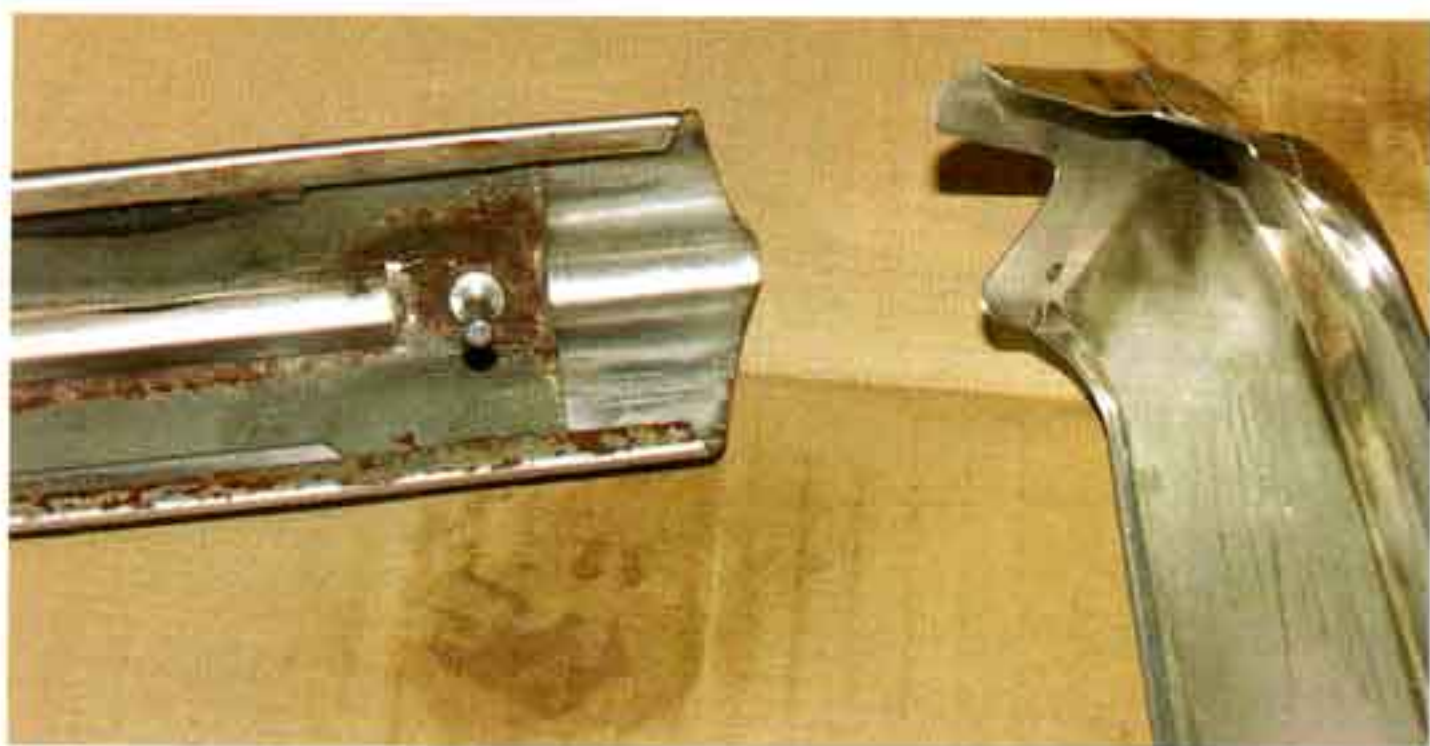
& 5b: To install the retainer back into the crown molding, place a small amount of grease on the edges of the retainer. This will help the retainer slide in easy. Using a hammer and brass punch, gently drive the retainer back into place. There will be marks in the crown moldings where the retainer was.
